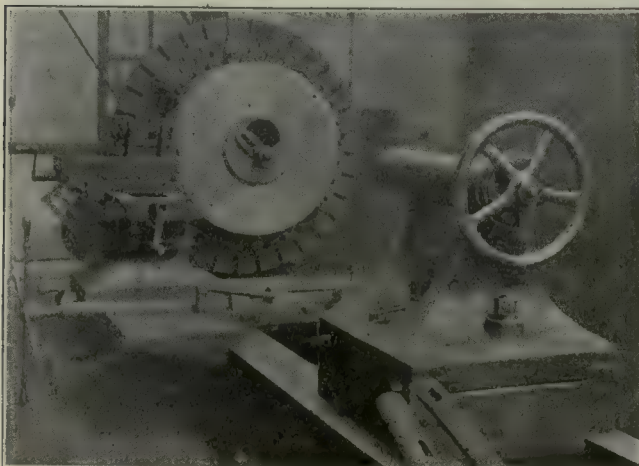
SCREW-CUTTING LATHE BUILT IN 1842
